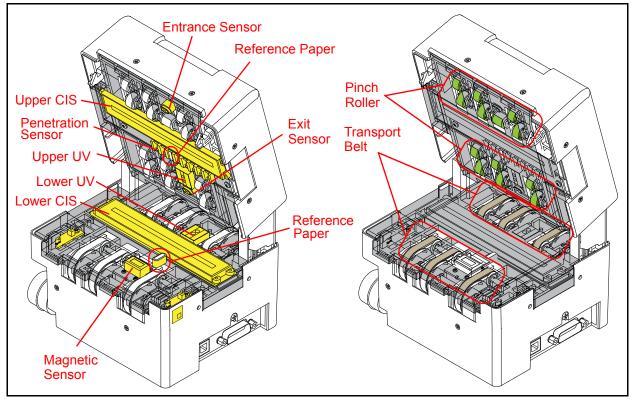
BAU Assembly Sensor/Roller/Belt Locations
